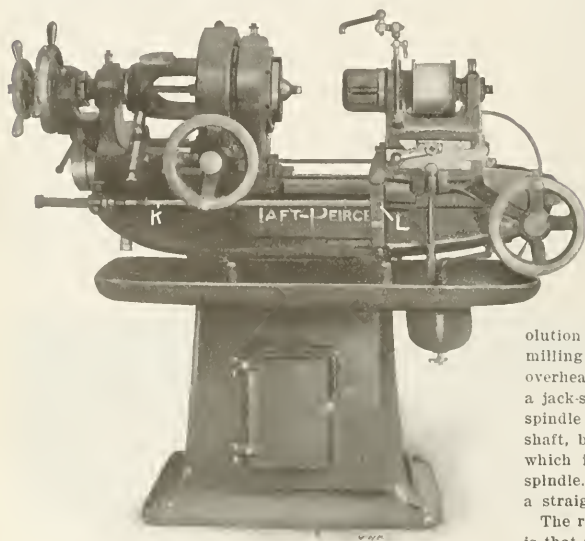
Archdale Thread Milling Machine built by the Taft-Peirce Mfg. Co.
